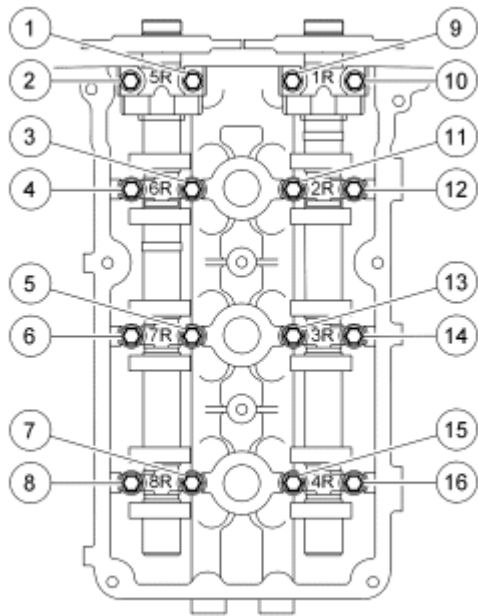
Identifying Left Camshaft Cap Bolt Tightening Sequence
